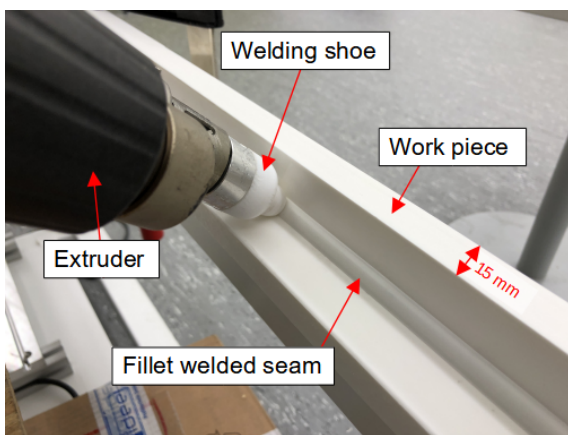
Extruder welding with robot and fillet welded seam.
